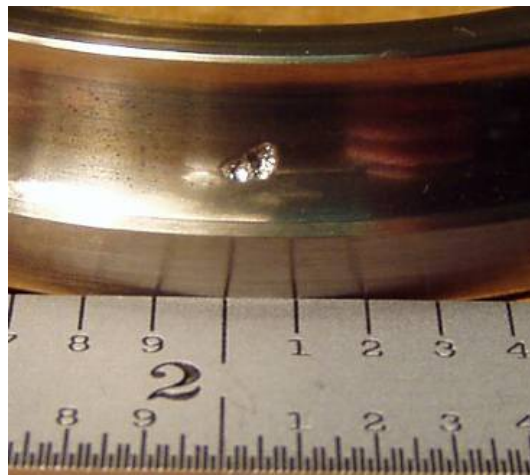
Example of a M50 NiL spalled ball bearing raceway.
